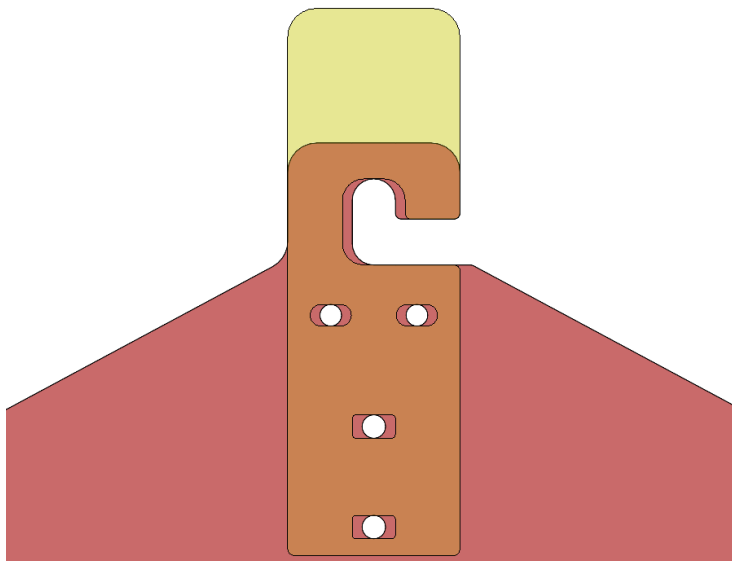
COLOUR-CODED SHELF-HALF OF THE SHELF CONNECTION SUBASSEMBLY.
